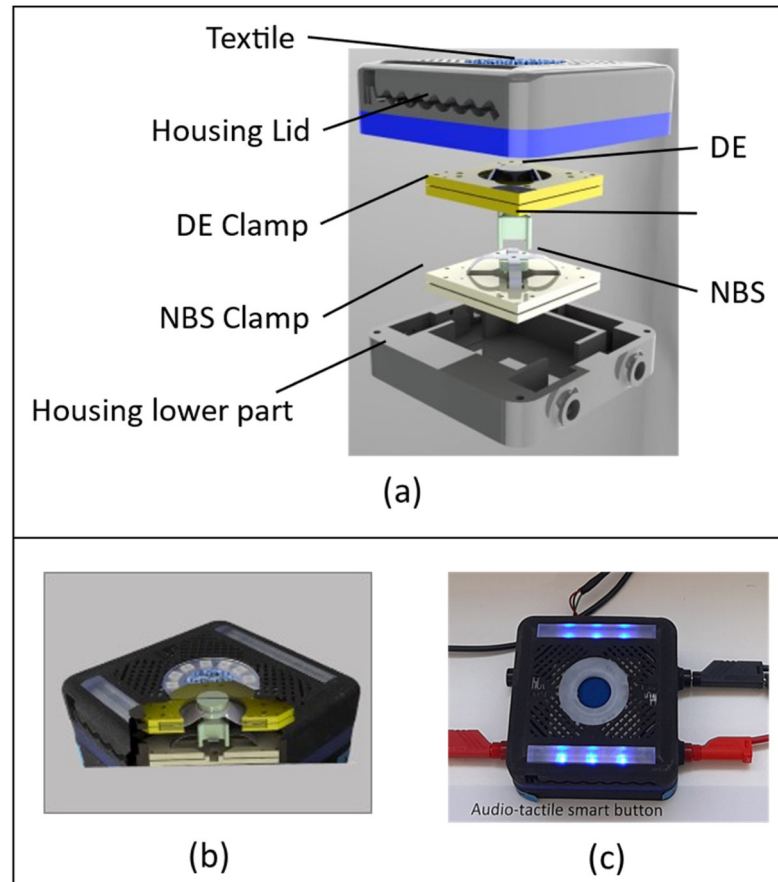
Housing of the DEA interface. (a) exploded view and (b) cut side view of the device and (c) top view with cables connected ([216]).
